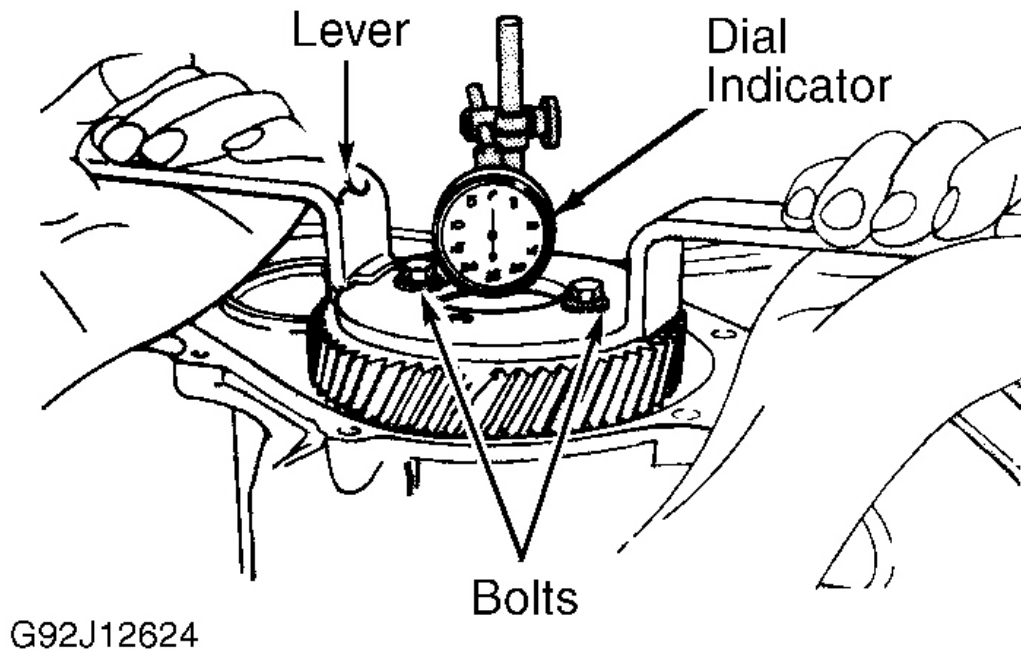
Checking Transfer Or Output Gear & Transfer Shaft End Play
